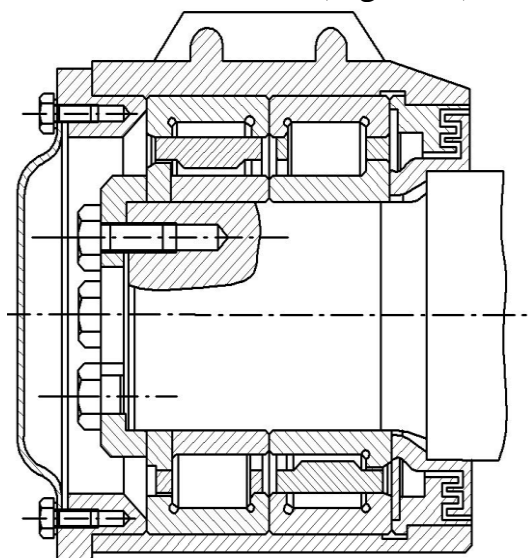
The box assembly of a freight car with cylindrical roller bearings on a thermal fit
